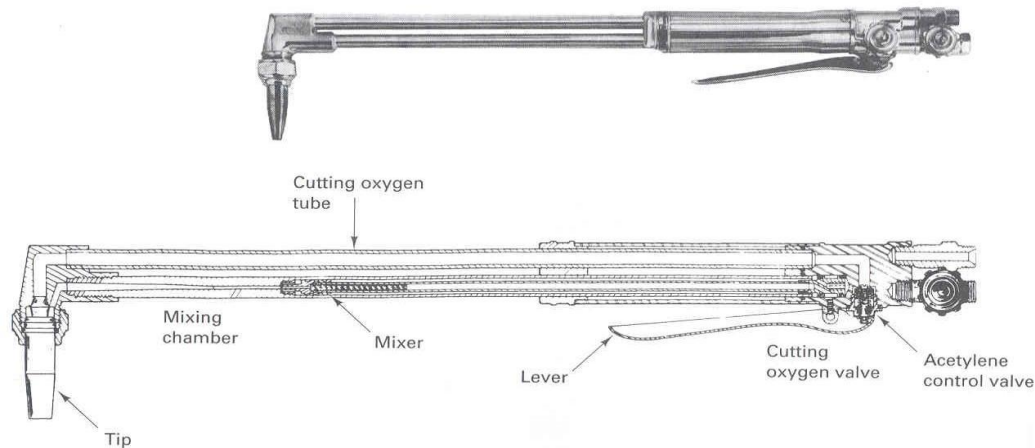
Typical oxyacetylene cutting torch and cross-sectional schematic.
